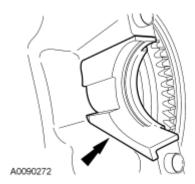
Locating Starter Motor Isolator Courtesy of FORD MOTOR CO.
